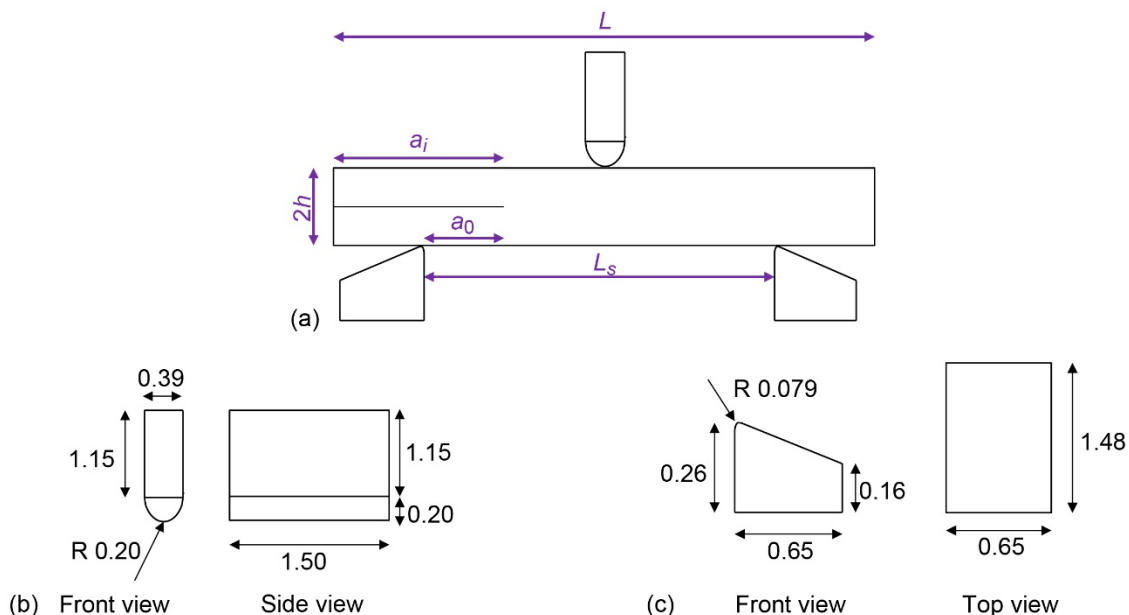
Typical ENF specimen geometry and fixture layout. (a) Geometry. (b) Loading fixture. (c) Support fixture.
